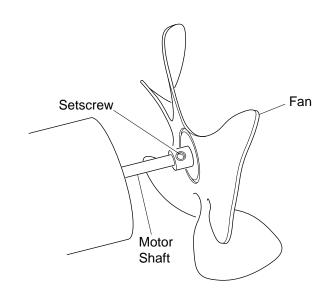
Fan, Motor Shaft, and Setscrew Location
